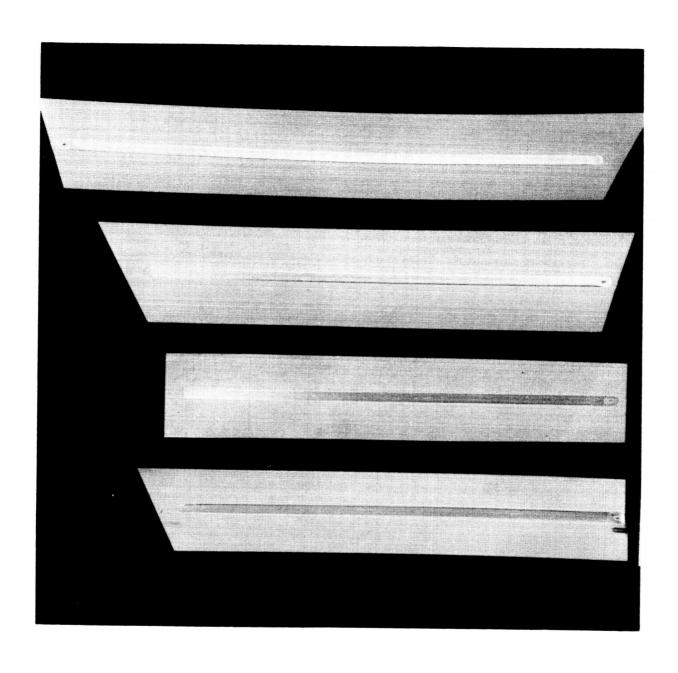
Bead-on-Plate GTA Welds on 0. 030 Inch Powder Metallurgy W-25Re-30Mo Alloy Sheet
